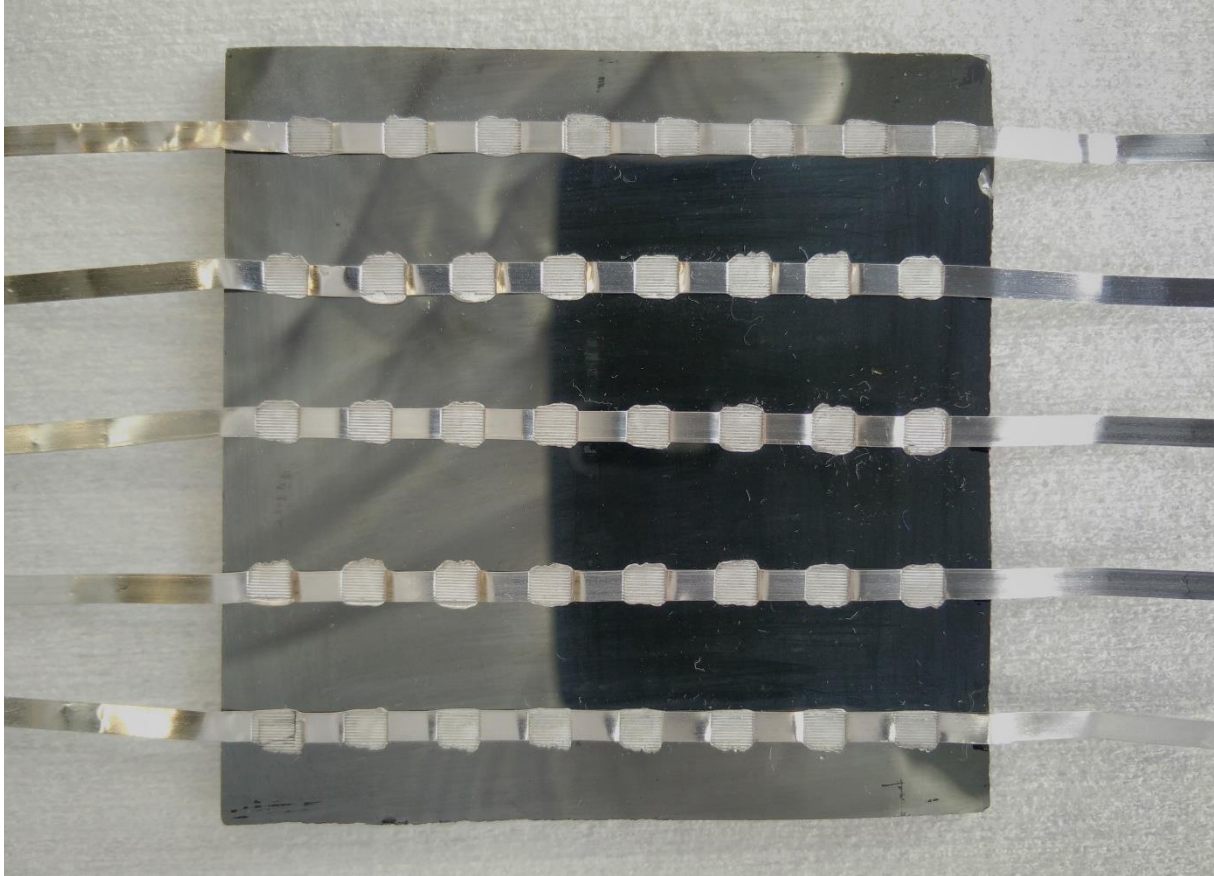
Ultrasonic welding sample on  $\text{MoSe}_2$
